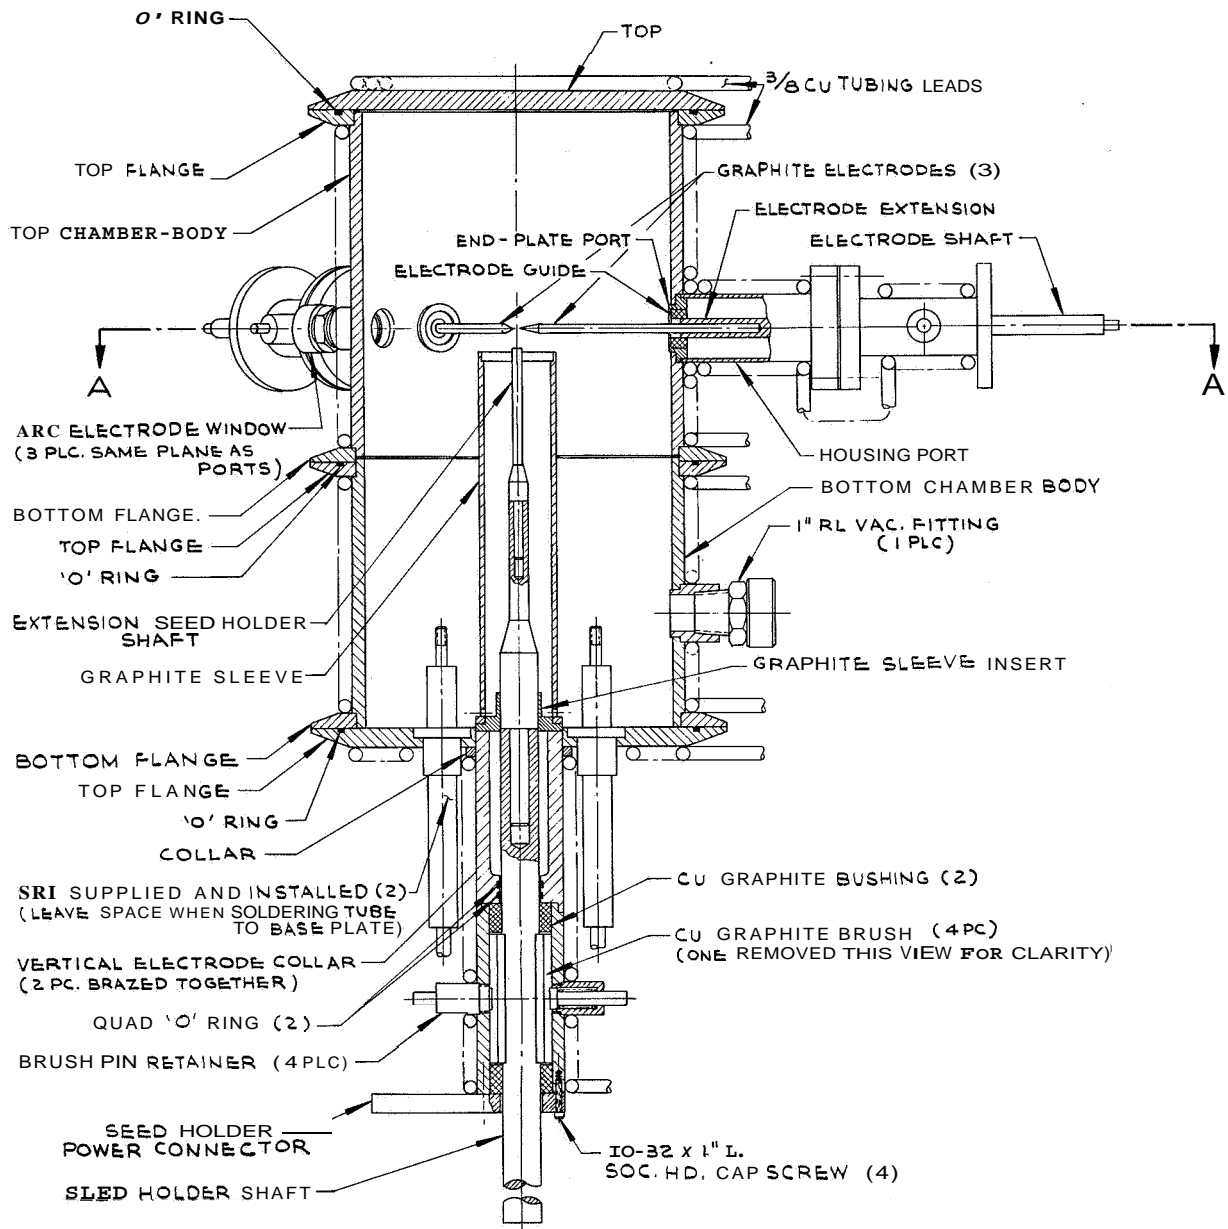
FRONT VIEW OF ARC-VERNEUIL FURNACE MOD 2 ASSEMBLY
